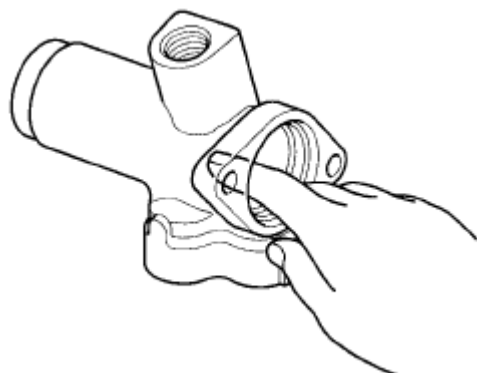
Identifying Inner Wall Of Valve Housing With Your Finger
